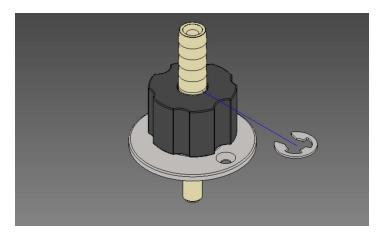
EXTERNAL E-CLIP REMOVAL
